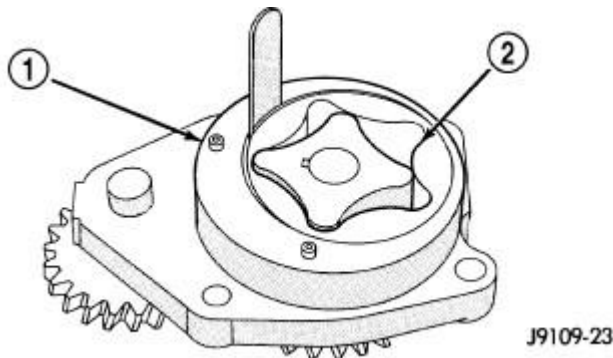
Measuring Gerotor Planetary To Body Bore Clearance
